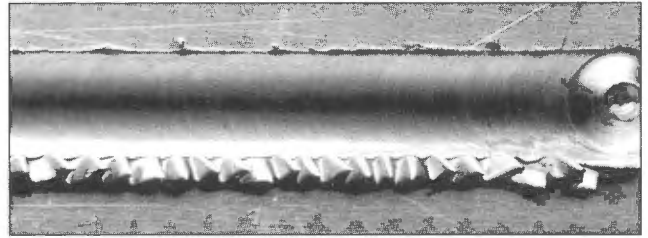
View of weld face with a defect of flash type made by FSW on aluminium alloy AMtsN 2 mm thick ( $\times 1.25$ )
